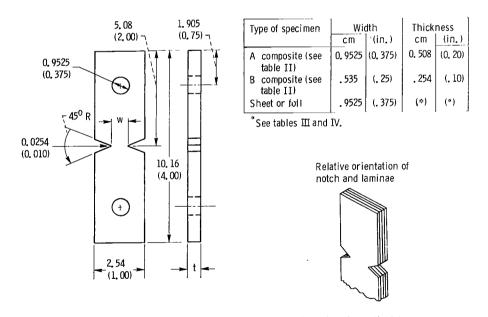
Notched tensile specimen. (All dimensions given in cm (in.).)
